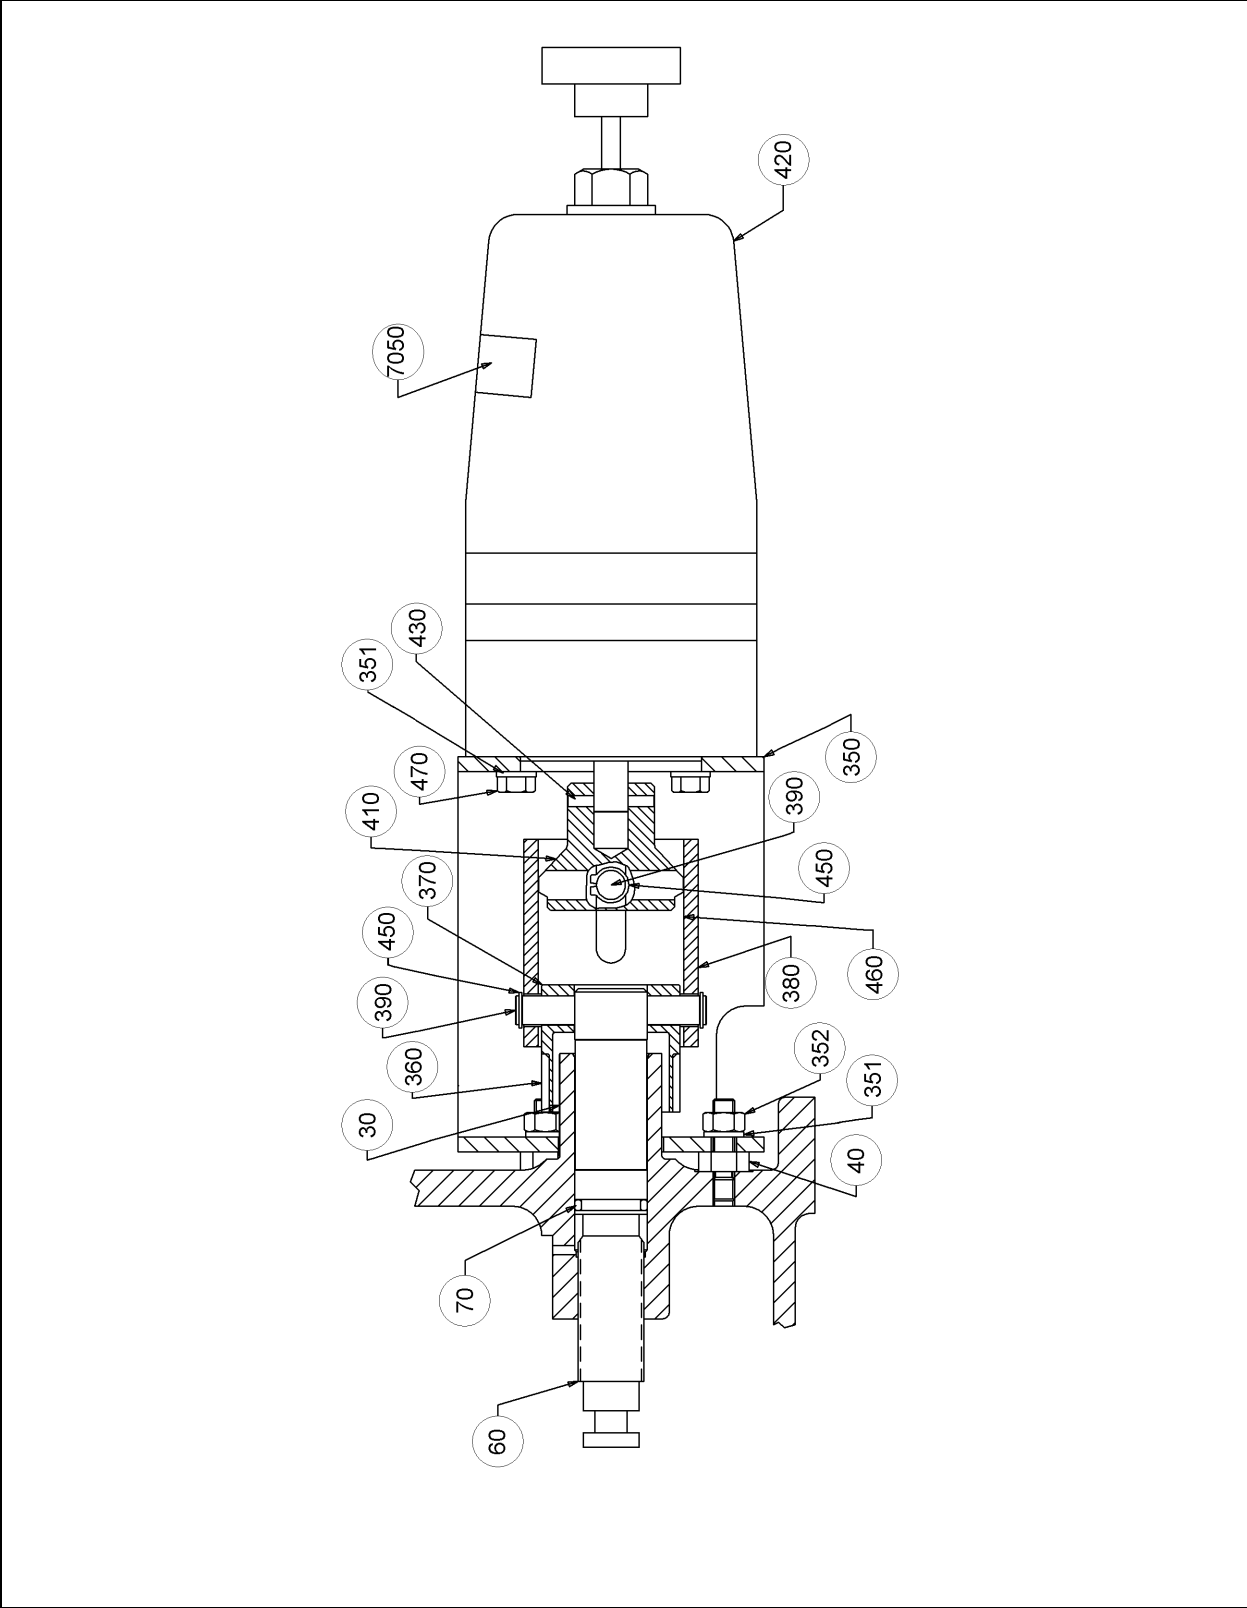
(Sheet 1 of 2). Milroyal B ECC Mounting Adapter (DWG. 1022095000).
